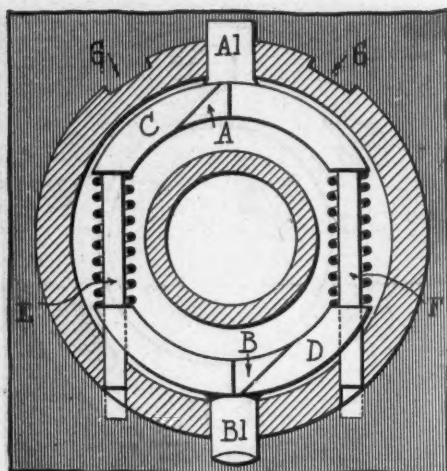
GOODYEAR DEMOUNTABLE WHEEL
